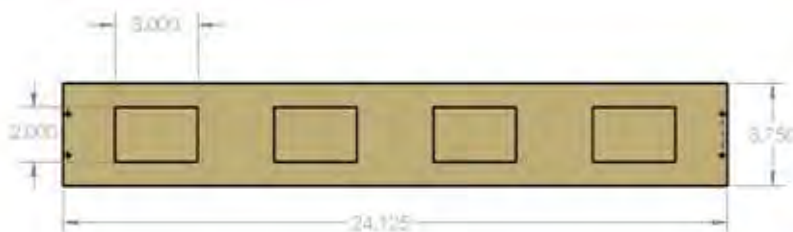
Drawing of bottom clad sheet for MP-1 samples.
